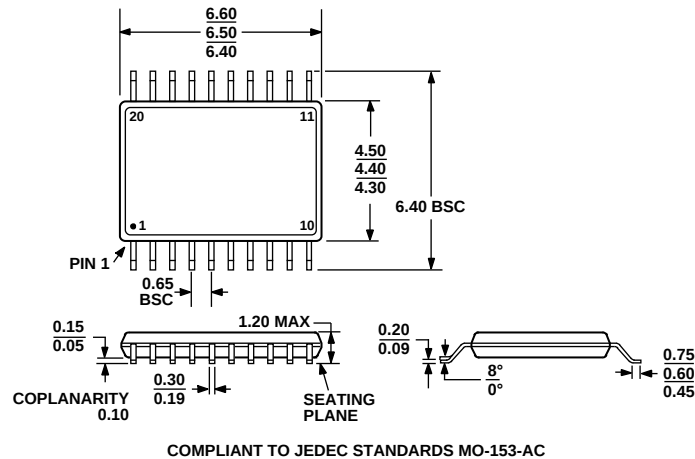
20-Lead Thin Shrink Small Outline Package [TSSOP]
